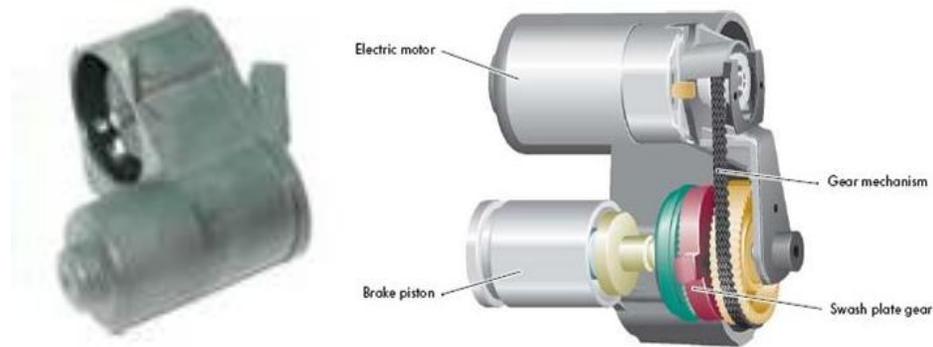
Caliper Motor Actuator mass reduced sub-assembly
